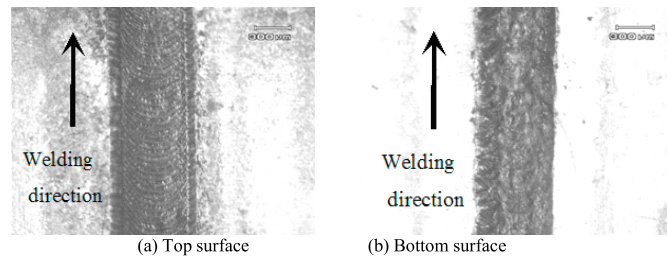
Weld morphology: 1.5J, 30Hz,-1mm defocus,100mm/min,7ms
